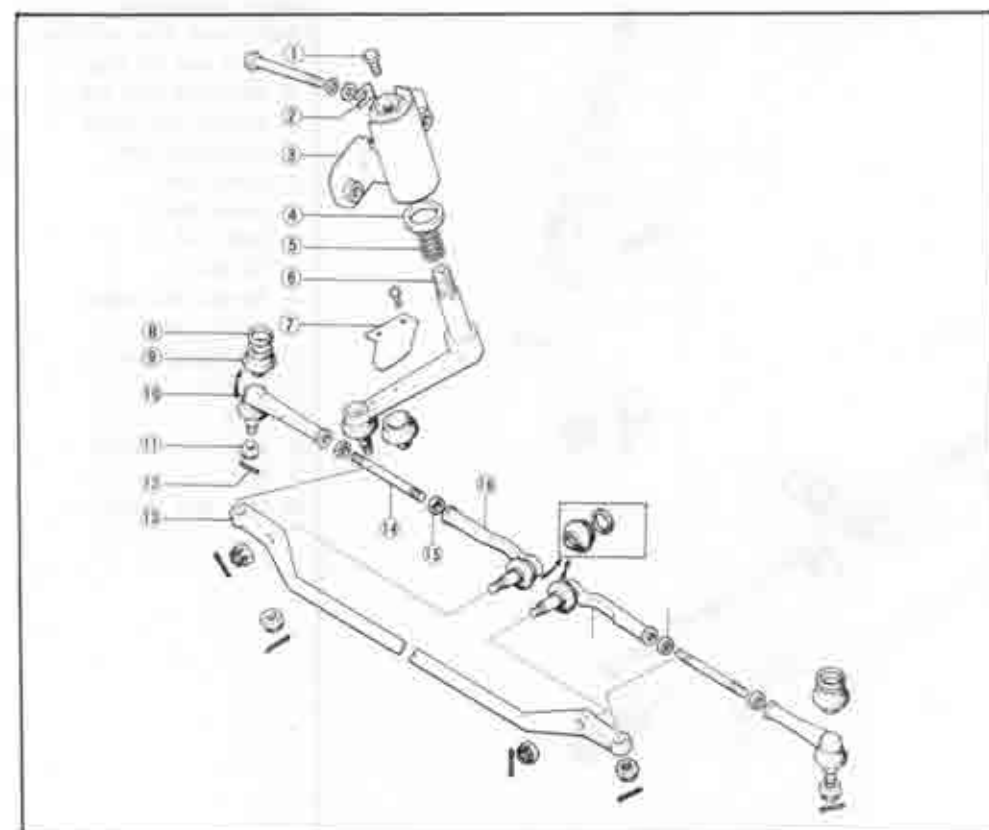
Steering linkage components (Left hand drive vehicles)
